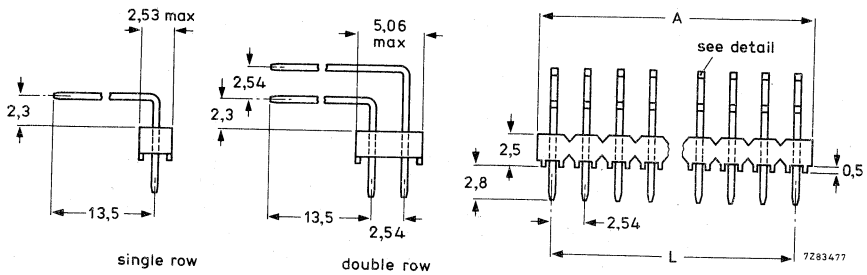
Male header with 90° angled pins; see Table 4 for dimensions A and L.
